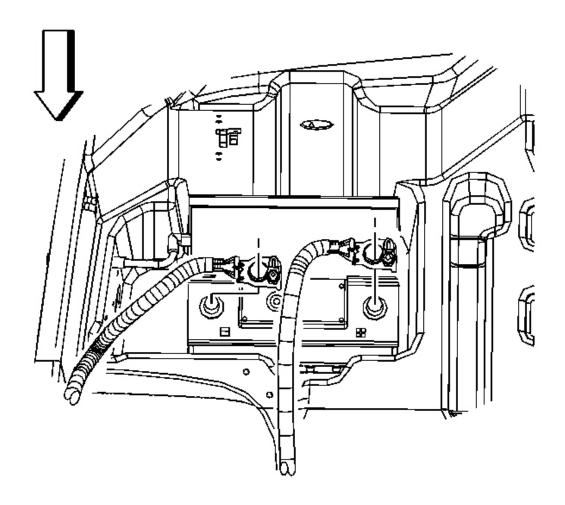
View Of Battery, Negative Cable & Nut Courtesy of GENERAL MOTORS CORP.
